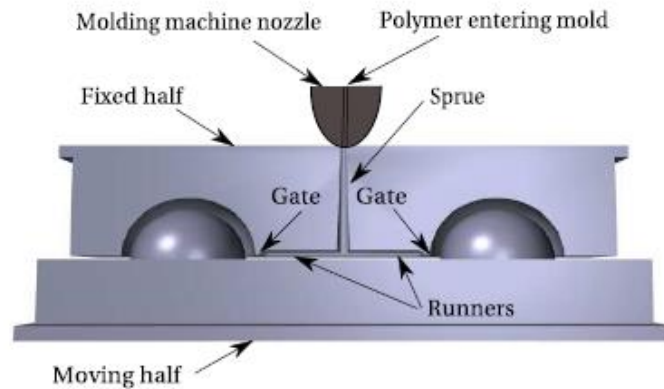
Two-Cavity Mould Showing Runner Concept [10]
